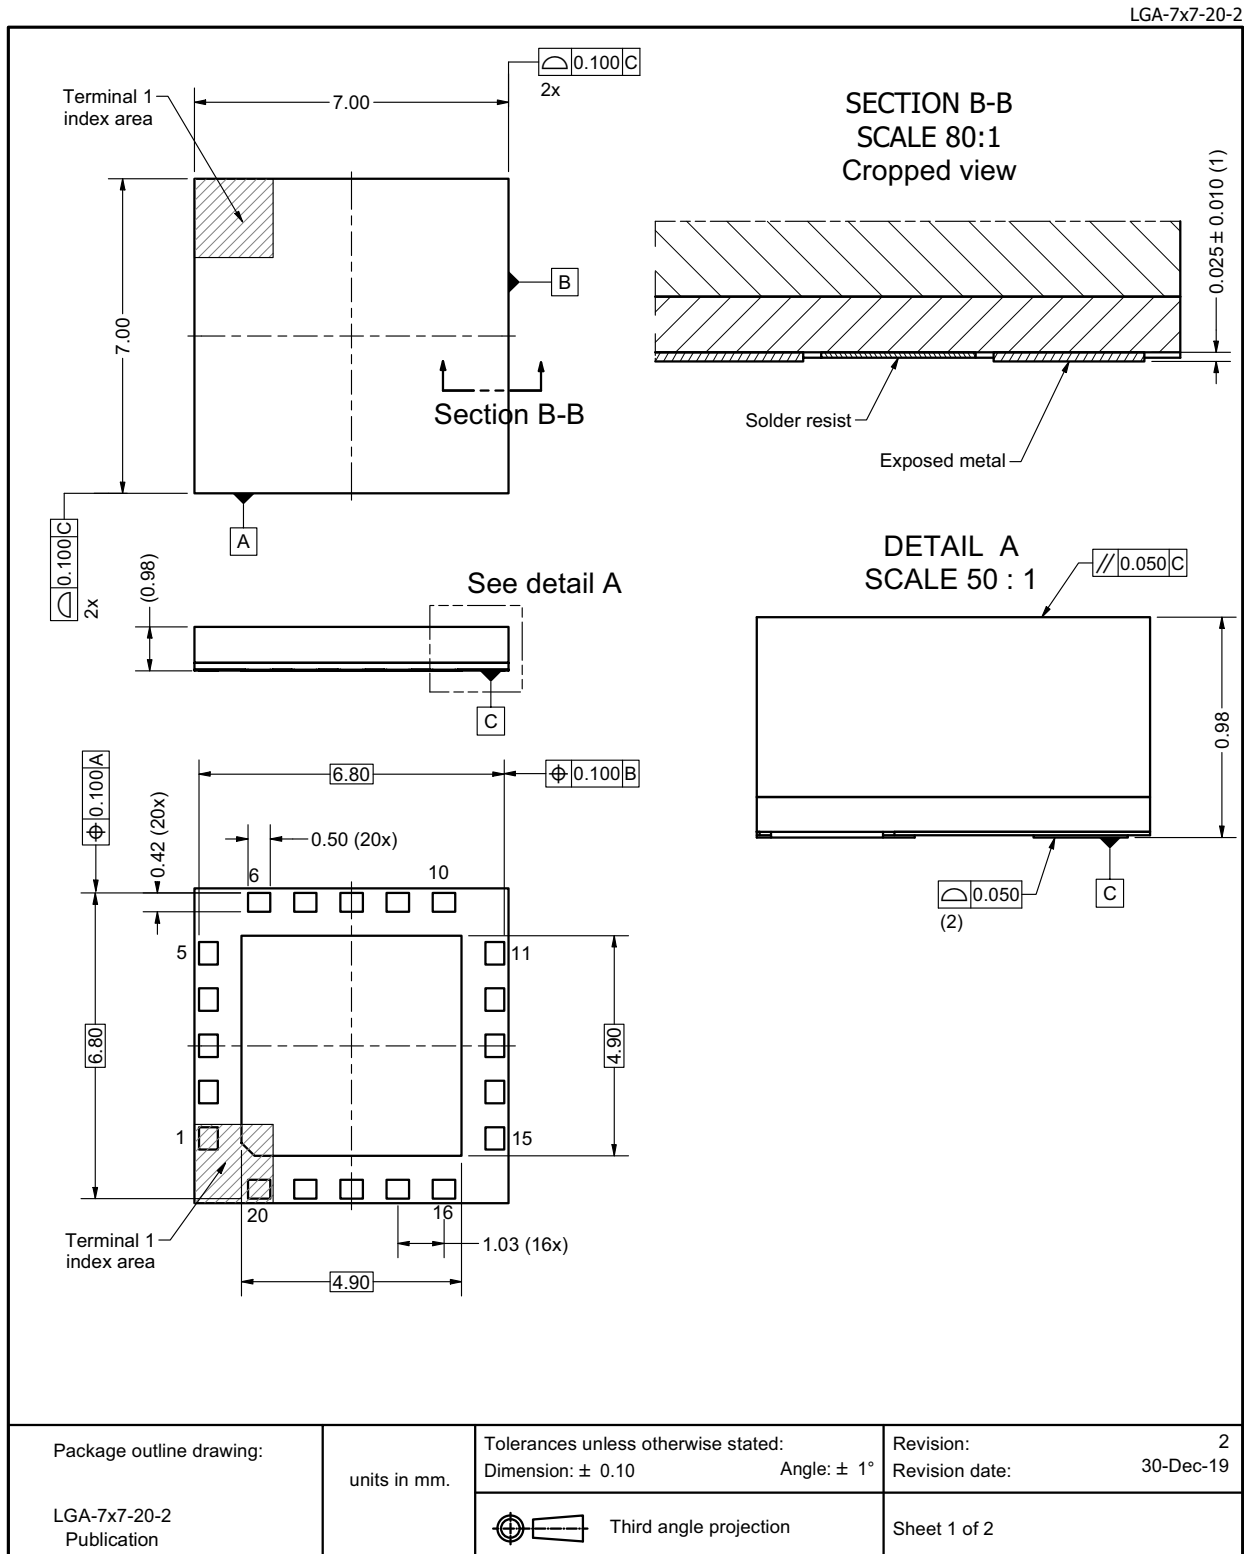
Package outline LGA-7x7-20-2 (sheet 1 of 2)
